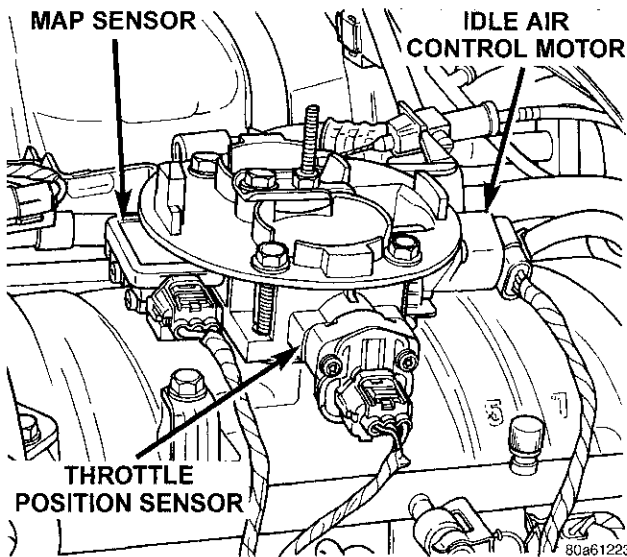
MAP and Throttle Position Sensor Location—3.9L/5.2L/5.9L Engines—Typical
